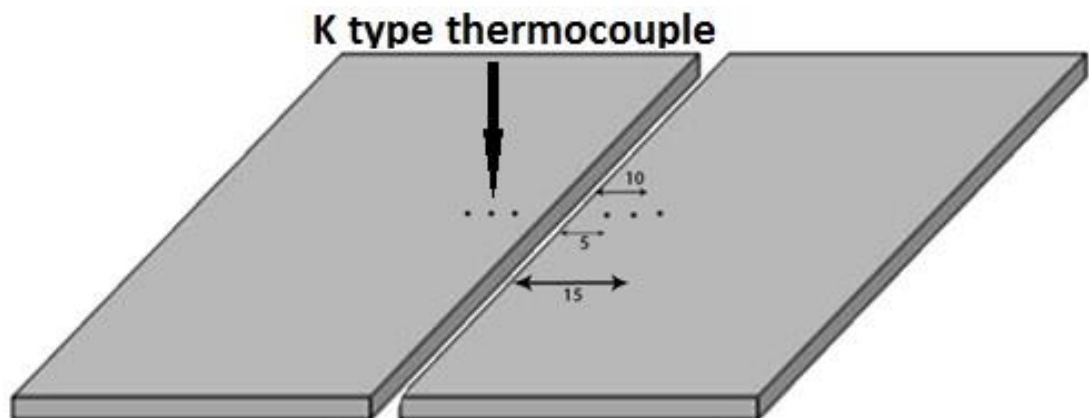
Schematic view of the holes drilled at the bottom surfaces of the plates
